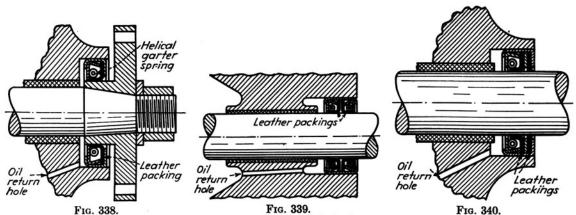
For retaining lubricant, the seal is assembled with the flanged leather projecting toward the bearing. The leather packing is clamped near the outer edge of the flange by the inner of two telescoping metal cups, a tight joint at the face being thereby assured. A garter-type spring compresses the leather about the shaft. Should misalignment occur, the seal is maintained by virtue of the flexibility of the leather and garter spring. To drain off the surplus oil passing the end of the bearing, a small hole is drilled in the casting connecting the reservoir.
